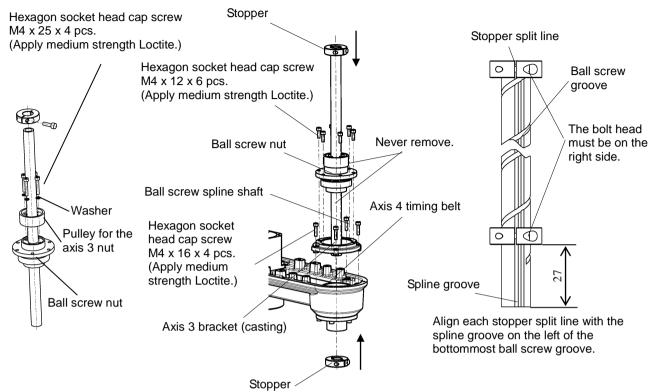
Mounting ball screw spline nut (KHL-300, KHL-400)
